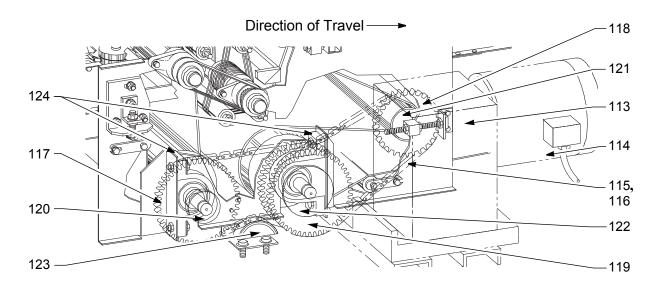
Drive Assembly, Dual Drive Diverter
